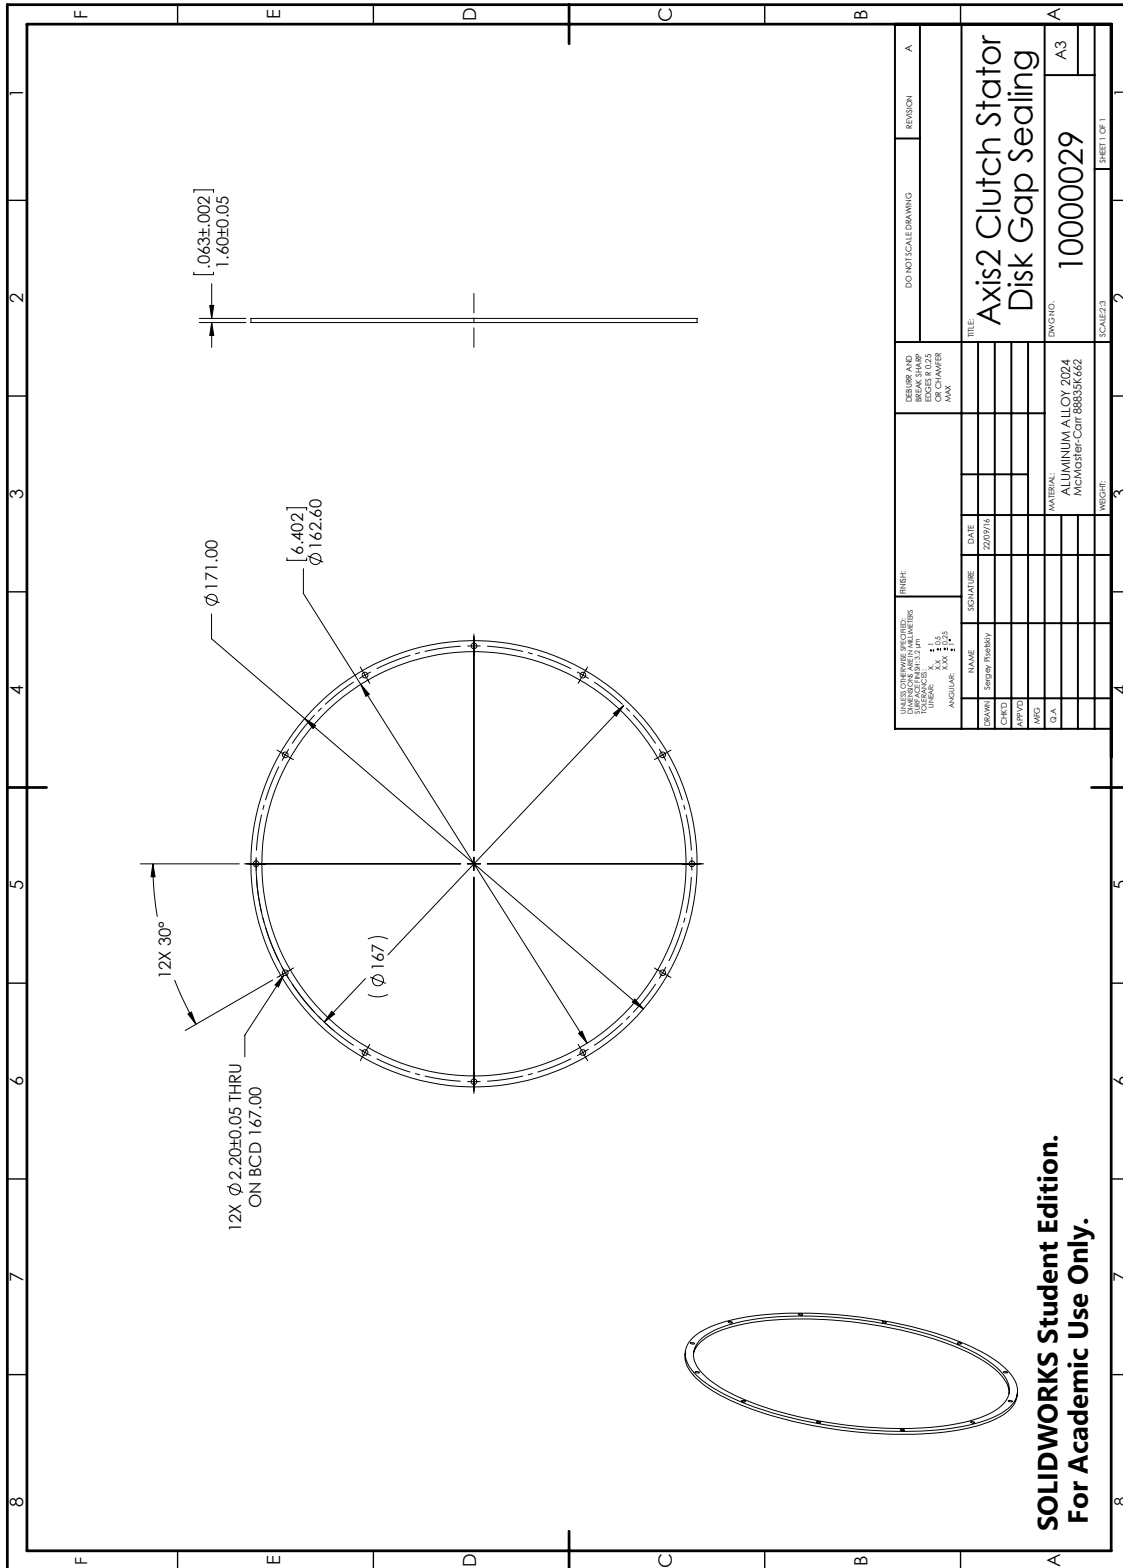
Drawing: Joint 2 clutch stator sealing spacer.
